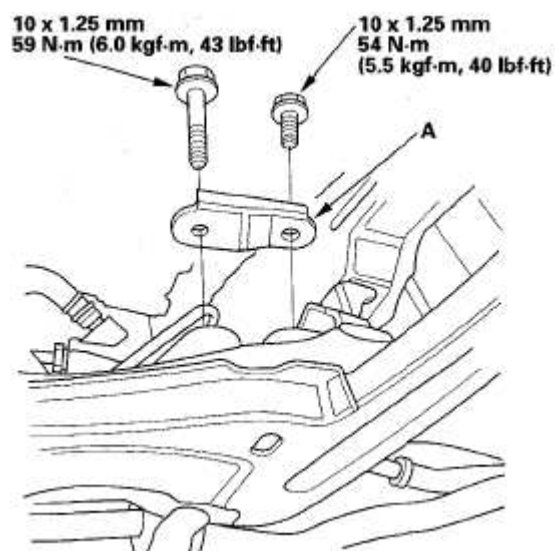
Identifying Steering Gearbox Mounting Bolt And Stiffener Bolt (With Torque Specifications)
